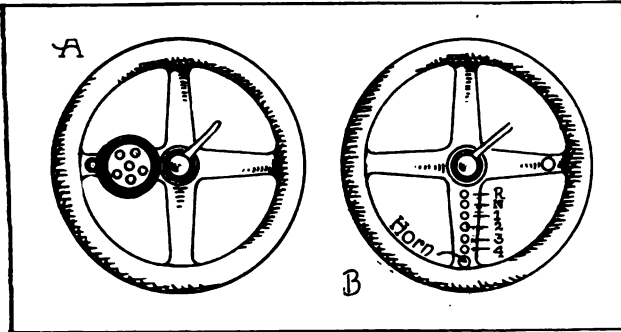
Control of Vulcan Electric Gearshift: A, Form Utilized on S. G. V. Car; B, Suggested Location Making for Convenience.
